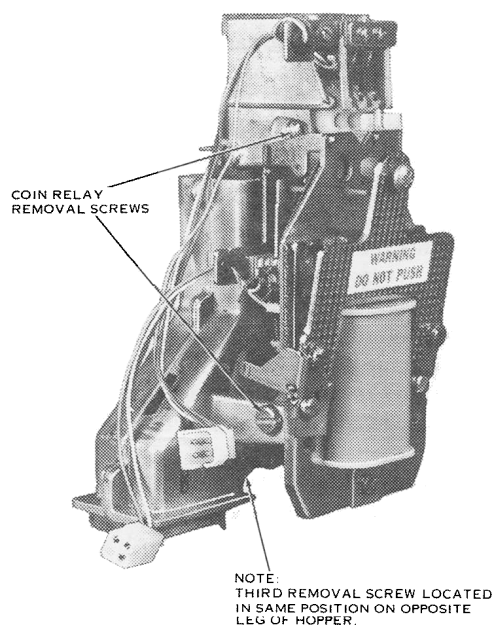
Coin Relay-Hopper and Coin Chute Assembly.
